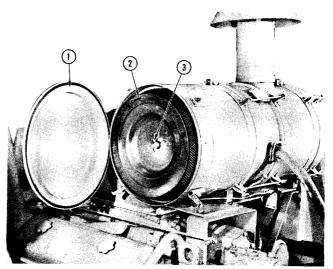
COVER REMOVED 1. Cover 3. Wing Bolt Cartridge 2.
